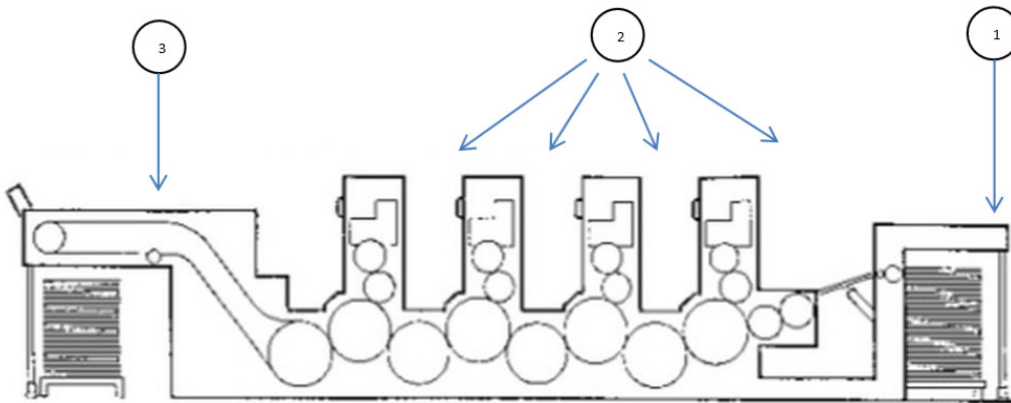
Heidelberg Speedmaster SM XL 75-4-P+L printing machine.
